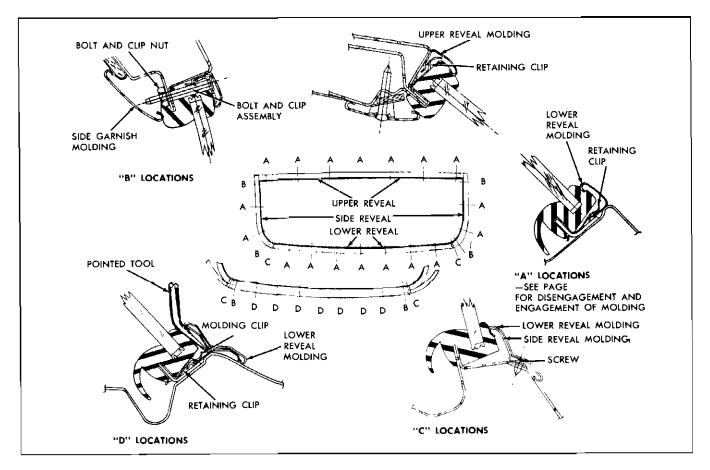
Back Window Reveal Moldings—39 Styles
